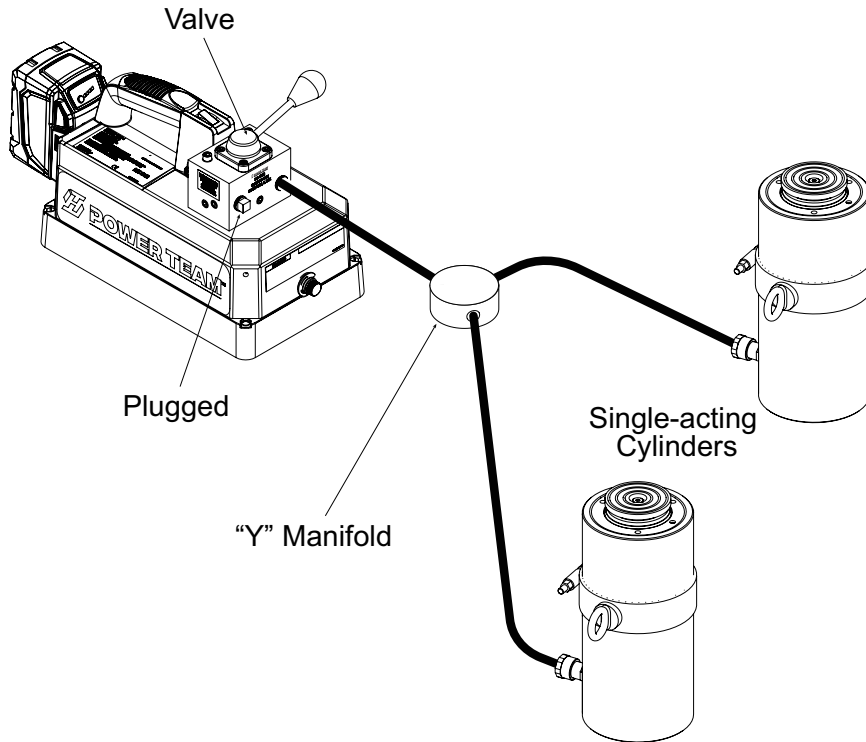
Single-Acting Cylinder(S) in the Circuit Controlled by a Pump-Mounted Valve
